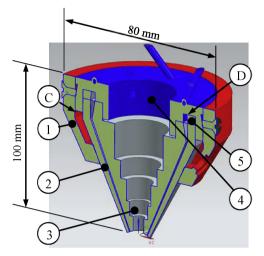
Cross section of the nozzle. (1) Outer cone; (2) Intermediate cone; (3) Inner cone; (4) Joint ring; (5) Conical ring.
